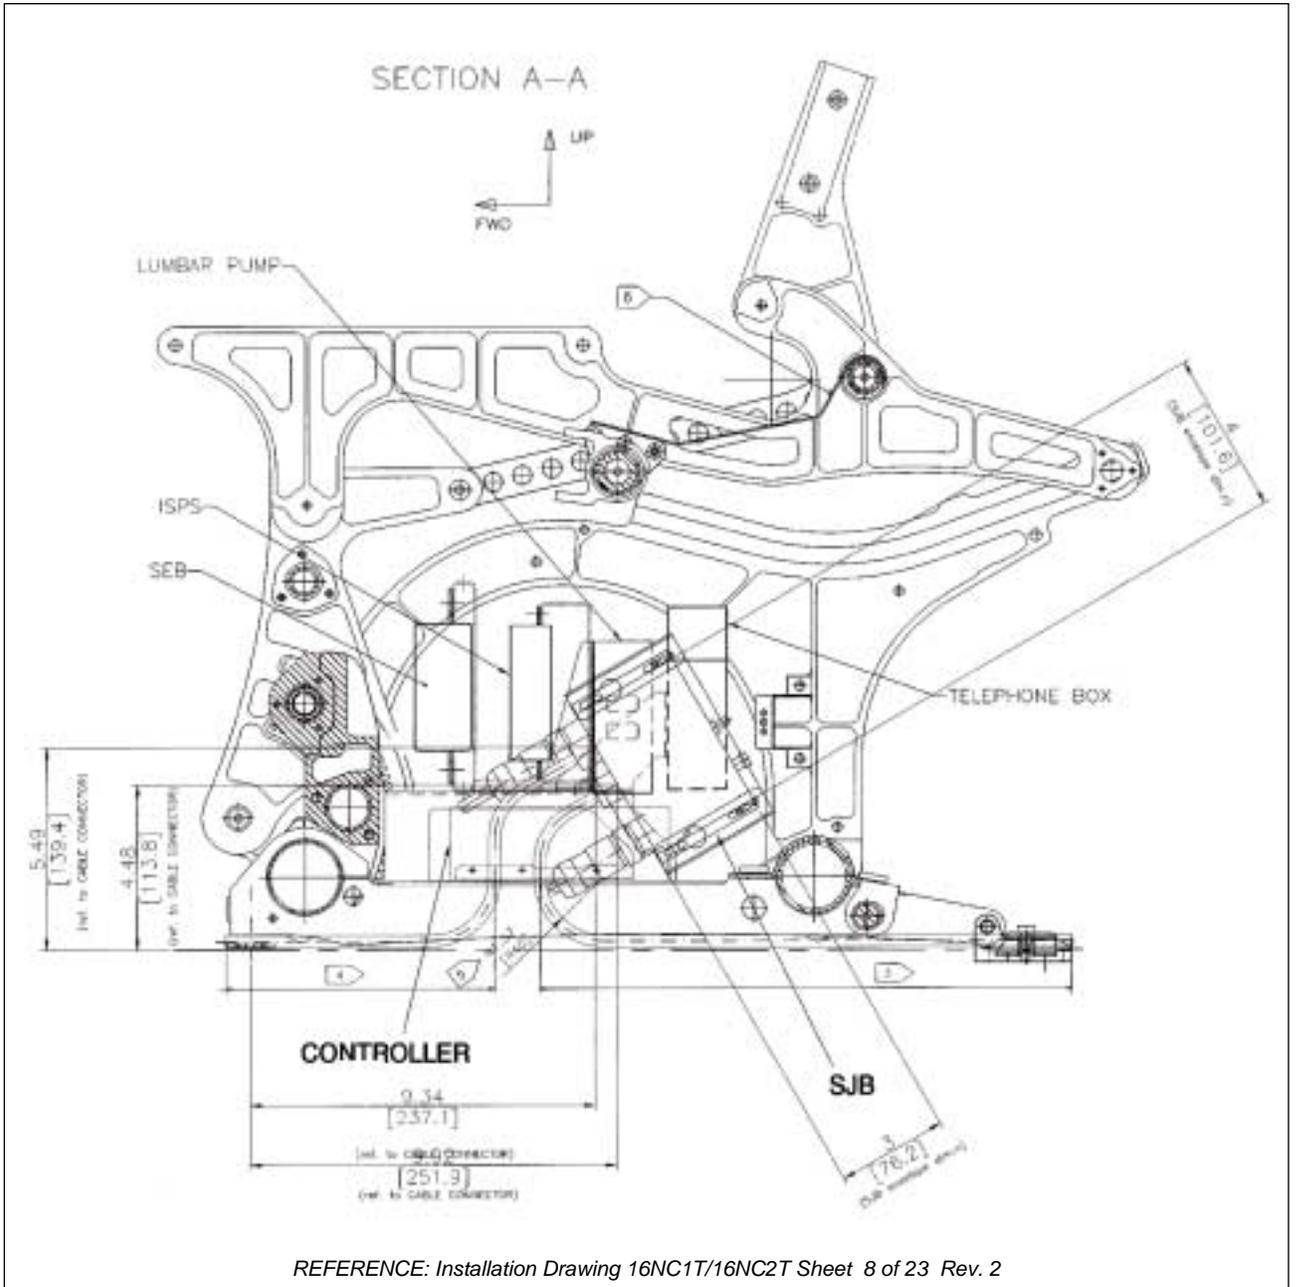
SJB INSTALLATION, SINGLE SEAT top view
